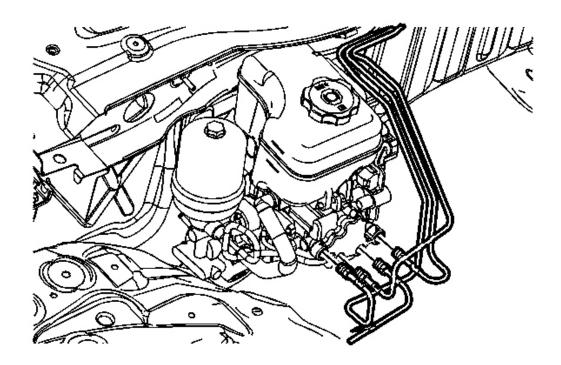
View Of Brake Pipe Fittings & The Master Cylinder Courtesy of GENERAL MOTORS CORP.
